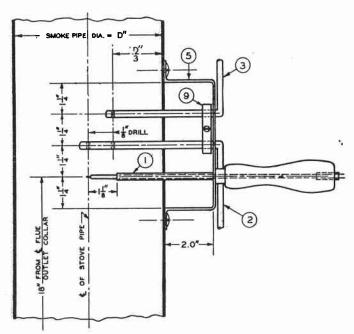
Gas-sampling and draft tubes, thermocouple, and support bracket assembly.
